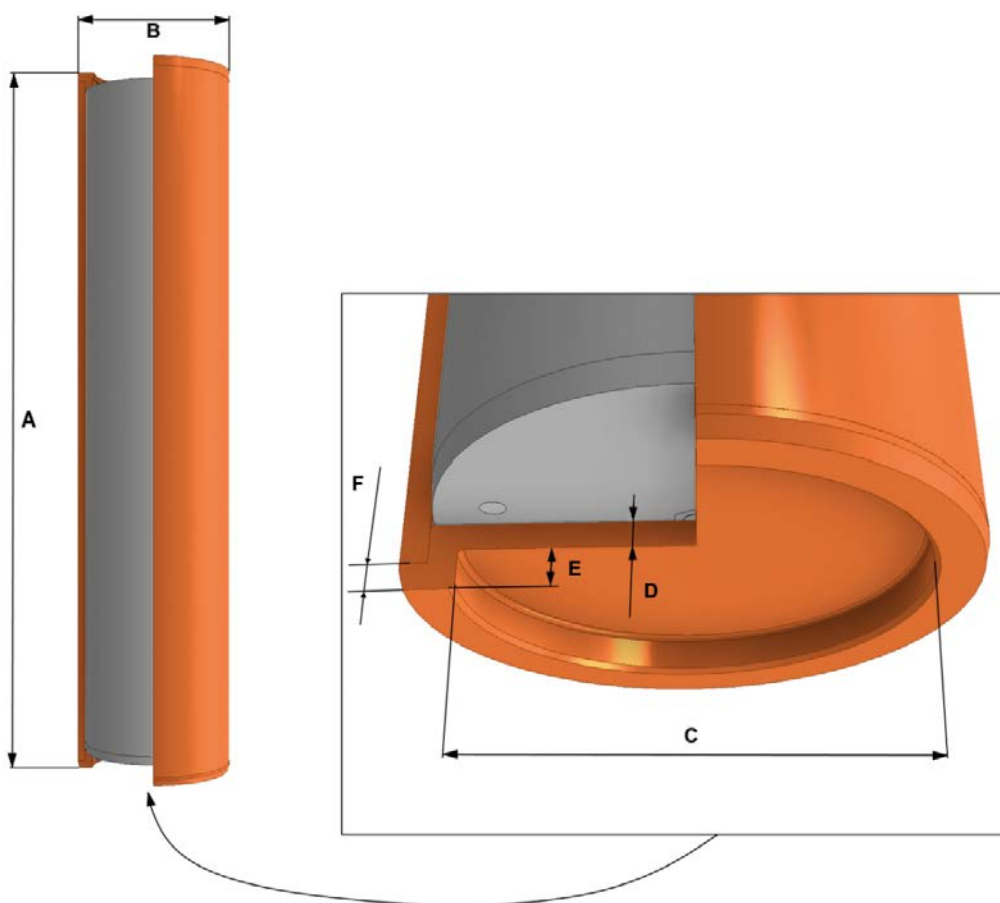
Cross section of the copper shell and welded copper base and the main dimensions.
